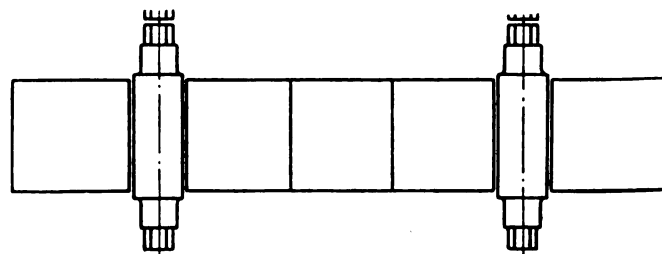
Arrangement of tandem mill, each roll stand being separately driven.
